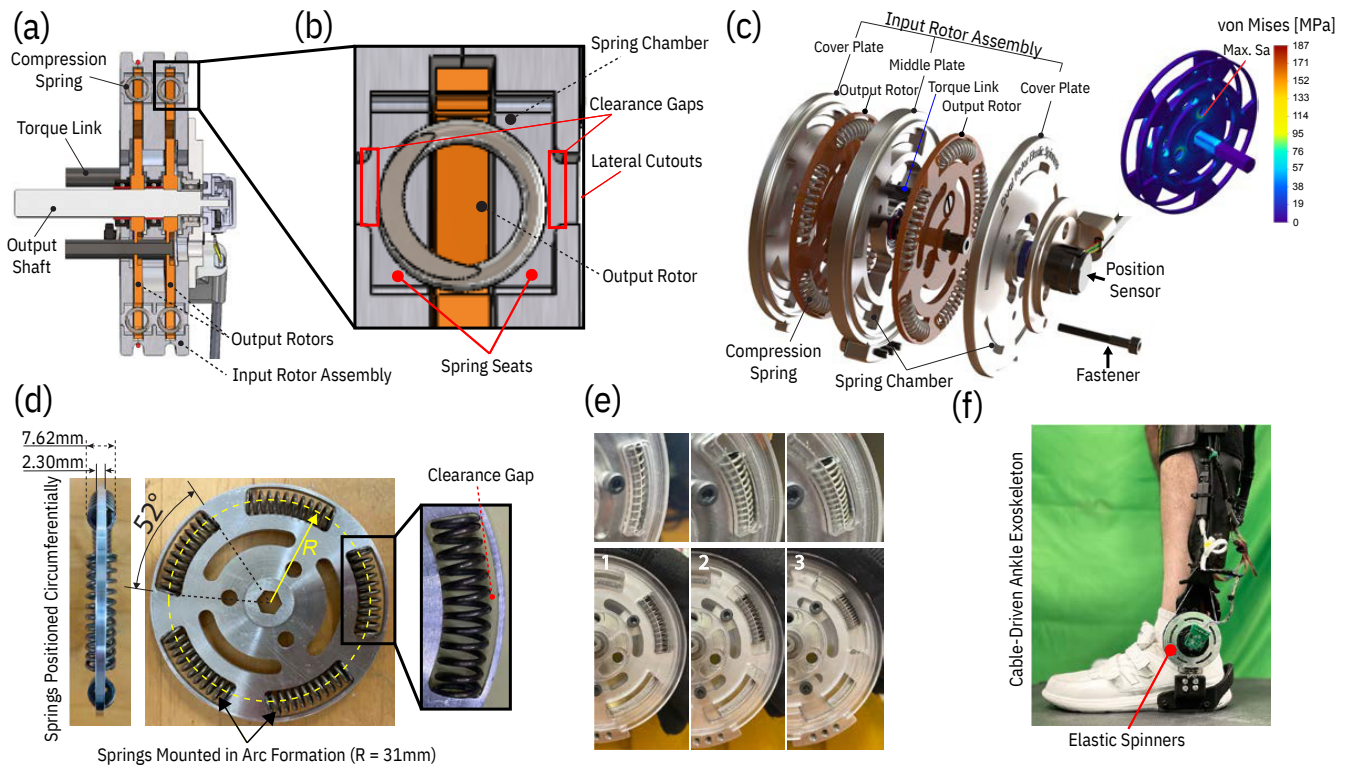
Design of *Elastic Spinners*: (a) Sectional view illustrating the output rotors enclosed within the input rotor assembly; (b) Sectional view of a spring chamber; (c) Exploded view, showing the components of *Elastic Spinners*; (d) Springs installed circumferentially on an output rotor with preload; (e) Progressive deformation of a compression spring (bottom row), showing the clearance gap between the spring coils and the cover plate (top row); (f) *Elastic Spinners* mounted on a powered ankle exoskeleton.
